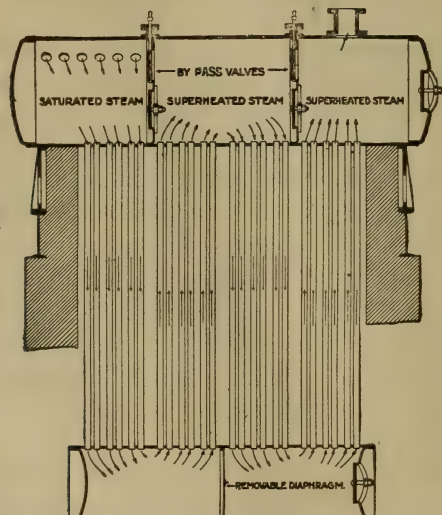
Arrangement of Tubes; Stirling Superheater.
